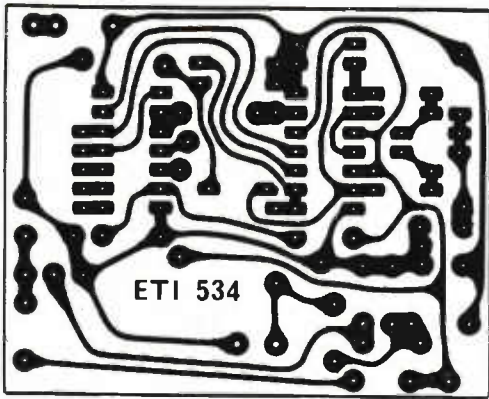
Printed circuit board layout. Full size 64 x 52 mm.
